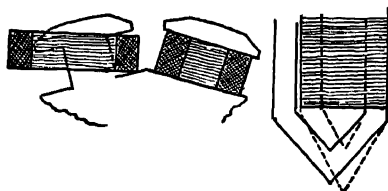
SKETCH SHOWING METHOD OF PUTTING MACHINE WOUND COILS ON THE POLES
